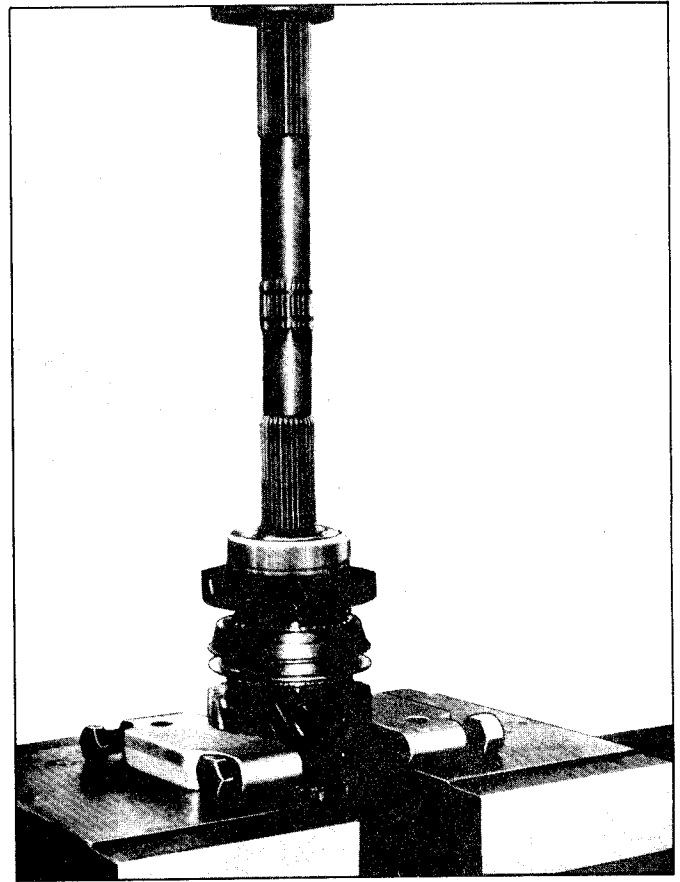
B-12K--Pressing Rear Bearing From Mainshaft
